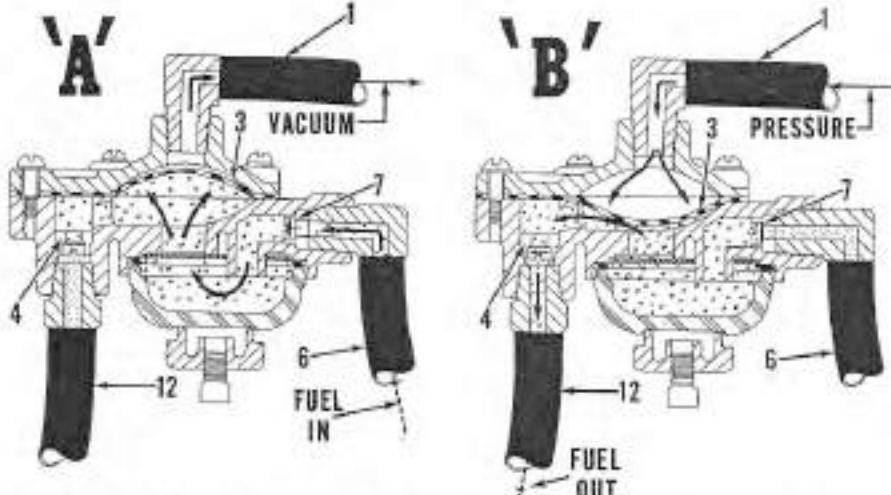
Schematic view of single stage fuel pump. The pump is operated by vacuum and pressure pulsations from one crankcase of the power head. Check valves (4 and 7) limit fuel flow to one direction through pump. Refer also to Fig. Mc82 for exploded view.
